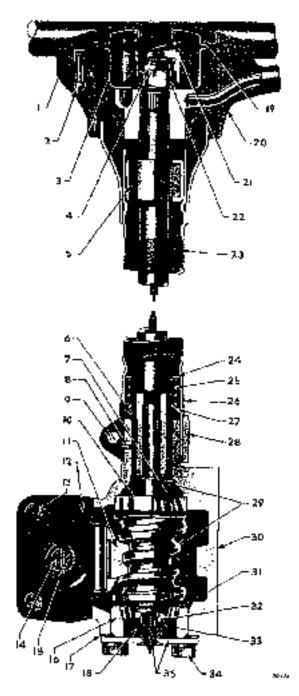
Steering Gear (Assembled View) (1939 Model P7)
